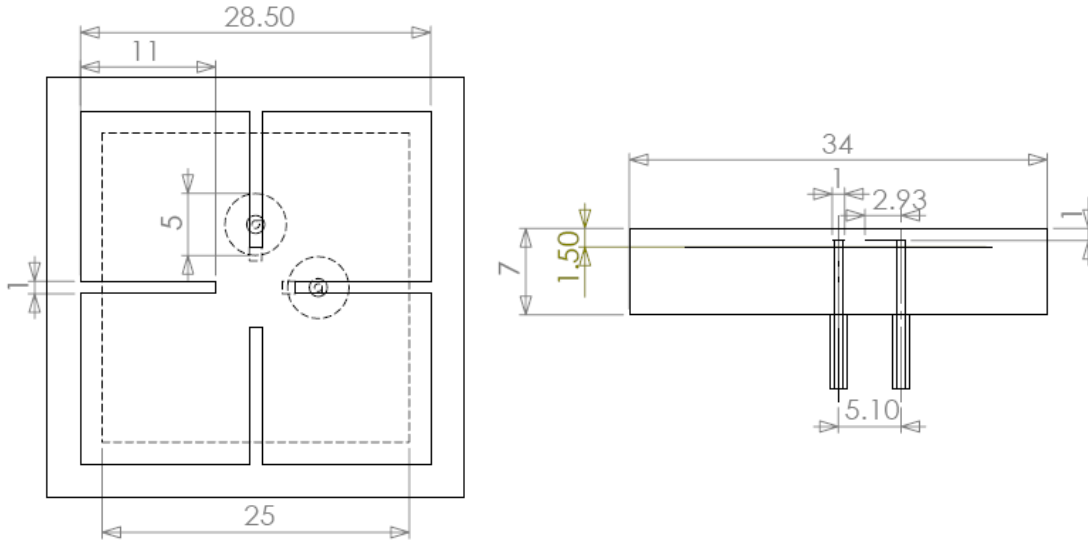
Dimensioned drawing for the optimized cavity backed dual band, CP, stacked-patch GPS antenna. Horizontal “L” probes are 2.93×1mm. All dimensions are in millimeters.
